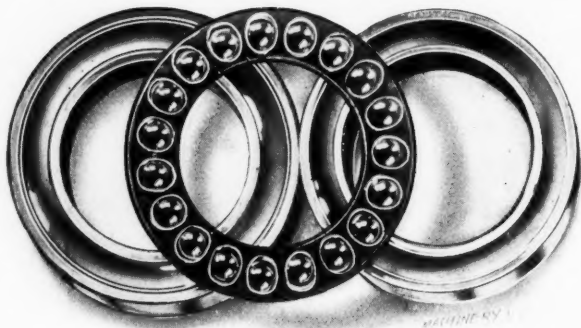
Upper and Lower Races for Thrust Bearing, and Balls with Retainer having Elliptical Holes
